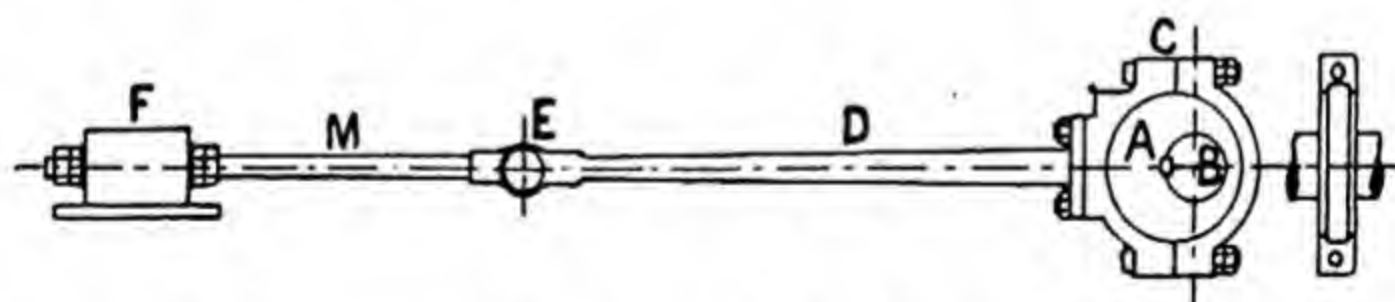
Arrangement of eccentric and rods for driving the slide valve.
